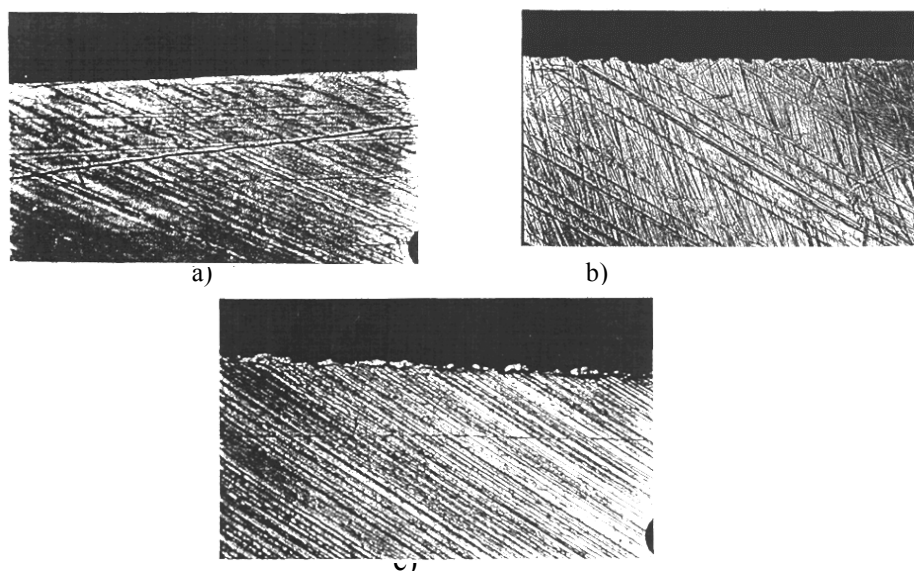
The photos of the cutting edges after the deburring by different sharpening tools
